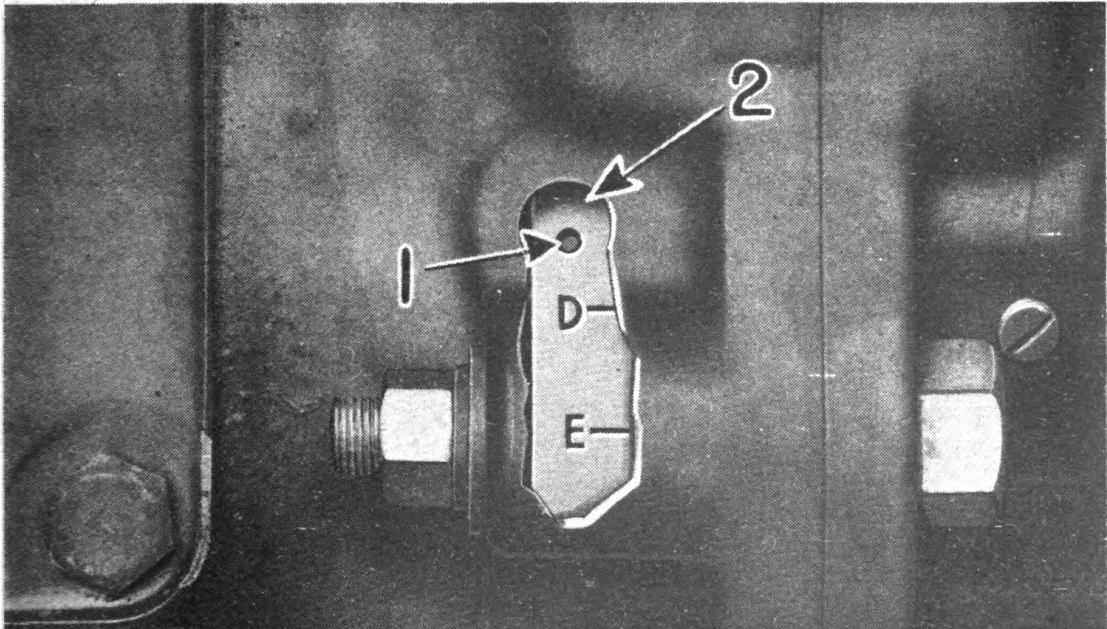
Inspection Hole and Timing Marks on Flywheel
